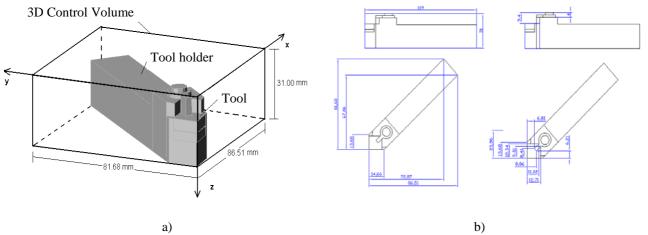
a) Three-dimensional thermal problem of the tool and tool holder b) Dimensions of the tool and tool holder assembly
